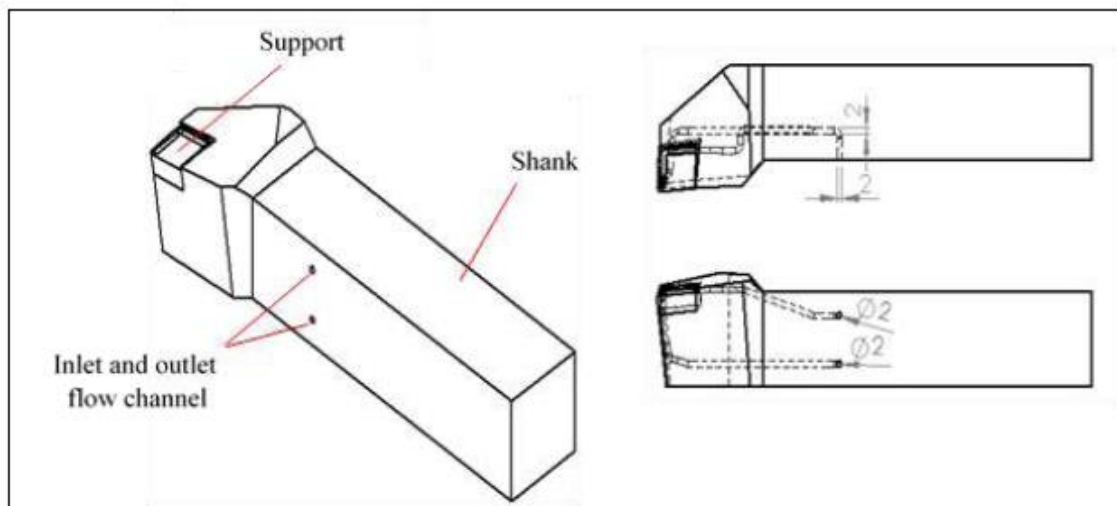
Internally cooled cutting tool design for 3D printing (Mod. Ghani et al. 2017, p. 3).
